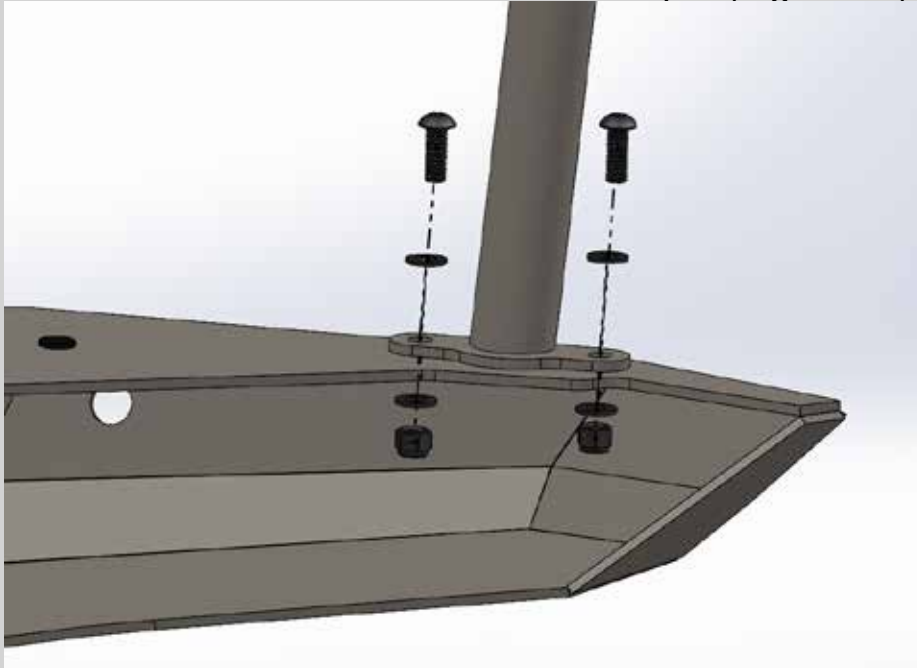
Hardware for headlight hoops or tube gussets to bumper.
